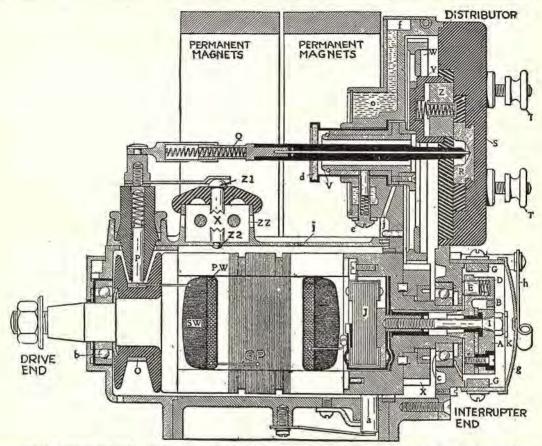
Longitudinal section of Bosch type DU4 high-tension magneto. Note that distributor brush (Z) is revolved by a large gear (W) which is driven by a smaller gear (X) on the armature shaft. The armature is driven by the engine.
